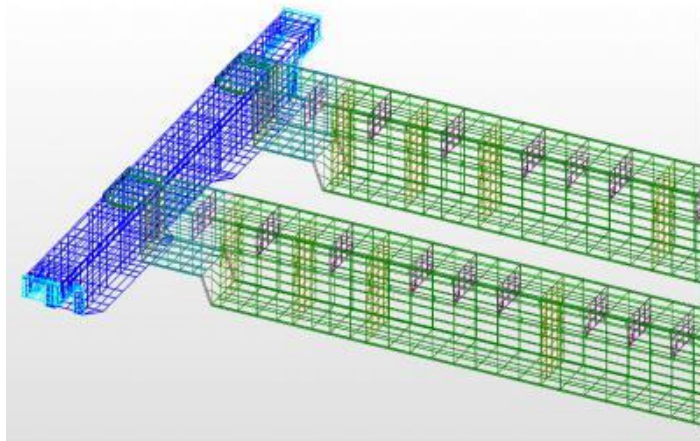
Bridge crane model along with the end span of girders including the internal structures.
